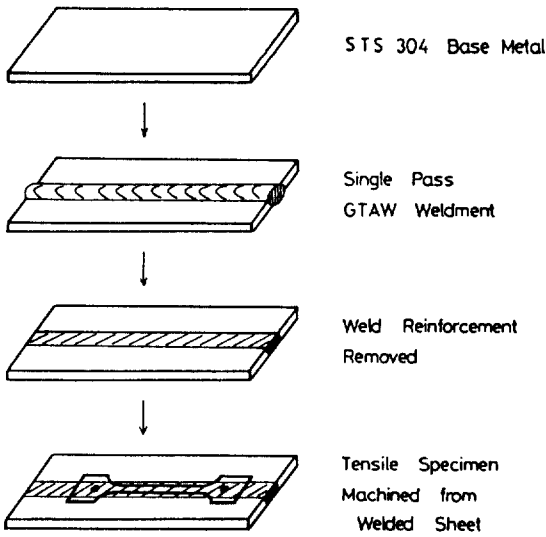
Schematic illustration of welding process and tensile specimen preparation.
